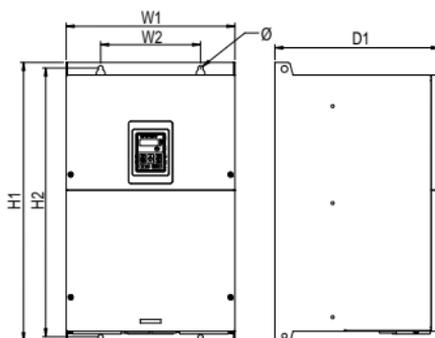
Wall mounting of 3PH 400V 90–110kW inverters (Dimension (unit: mm))
